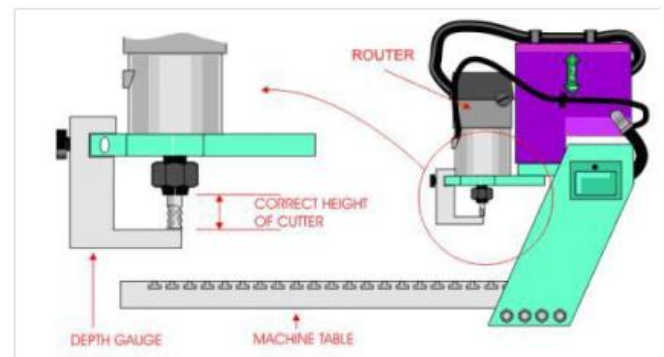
A special depth gauge is used to accurately set up the cutting tools
